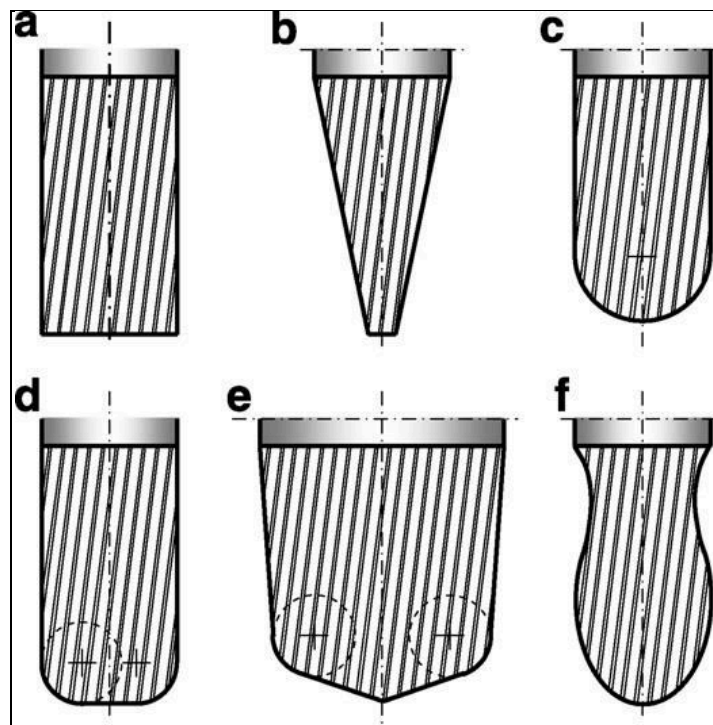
Various cutting tools for machining a given sculptured surface P on multi-axis NC machine (a) Cylindrical (b) Conical (c) Ball-End (d) Fillet-End (e) APT tool (f) General Cutting Tool
